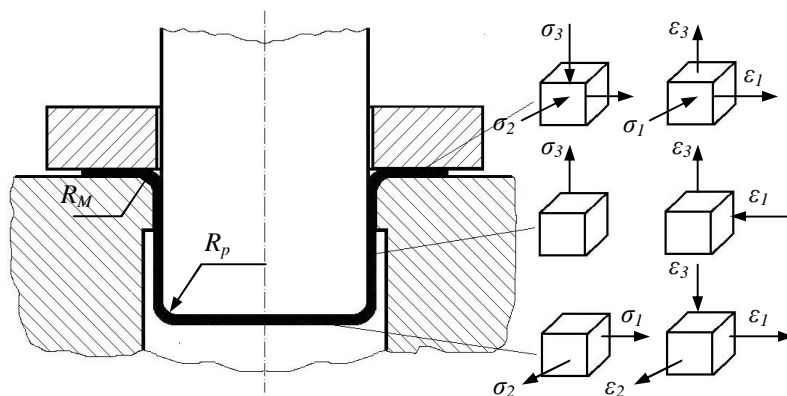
Mechanical scheme of cylindrical pieces drawing.
